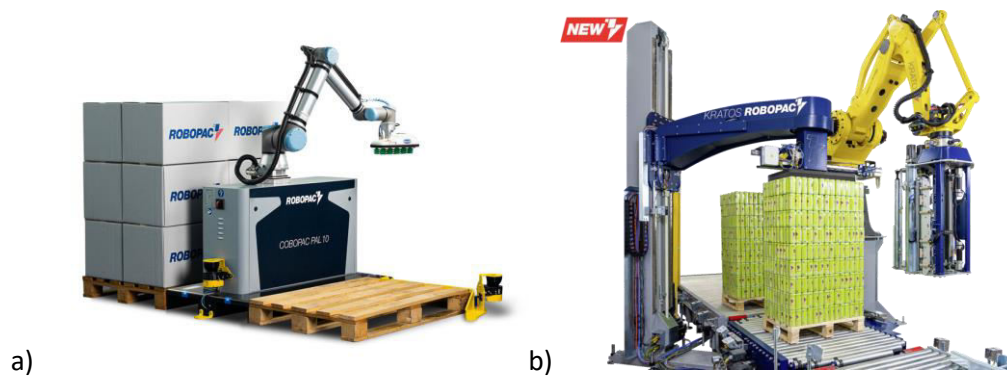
Palettizing automated robot arm (a) and automatic stretch wrapping machine (b) [20].
